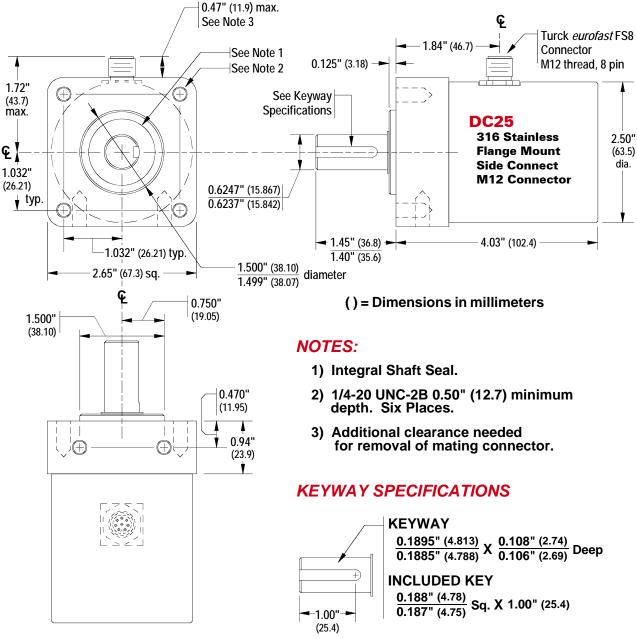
316 Stainless Body, 5/8" Shaft, Face Mount, Side Connect Outline Drawing
